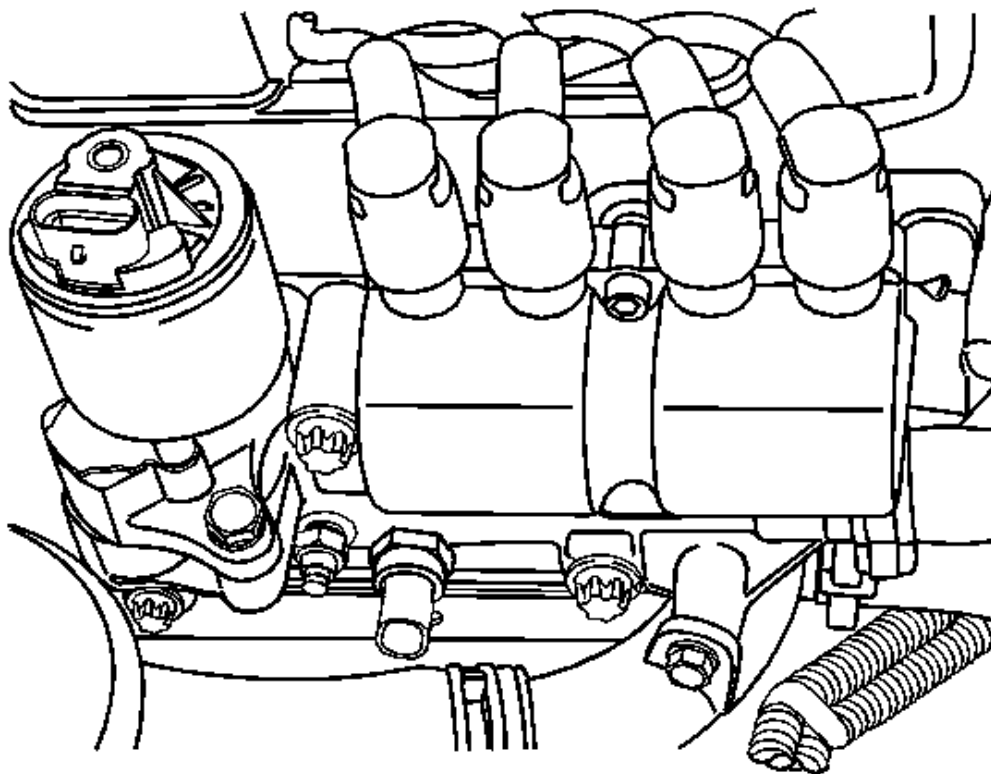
View Of DIS Coil, EGR, Mounting Bracket And Bolts
